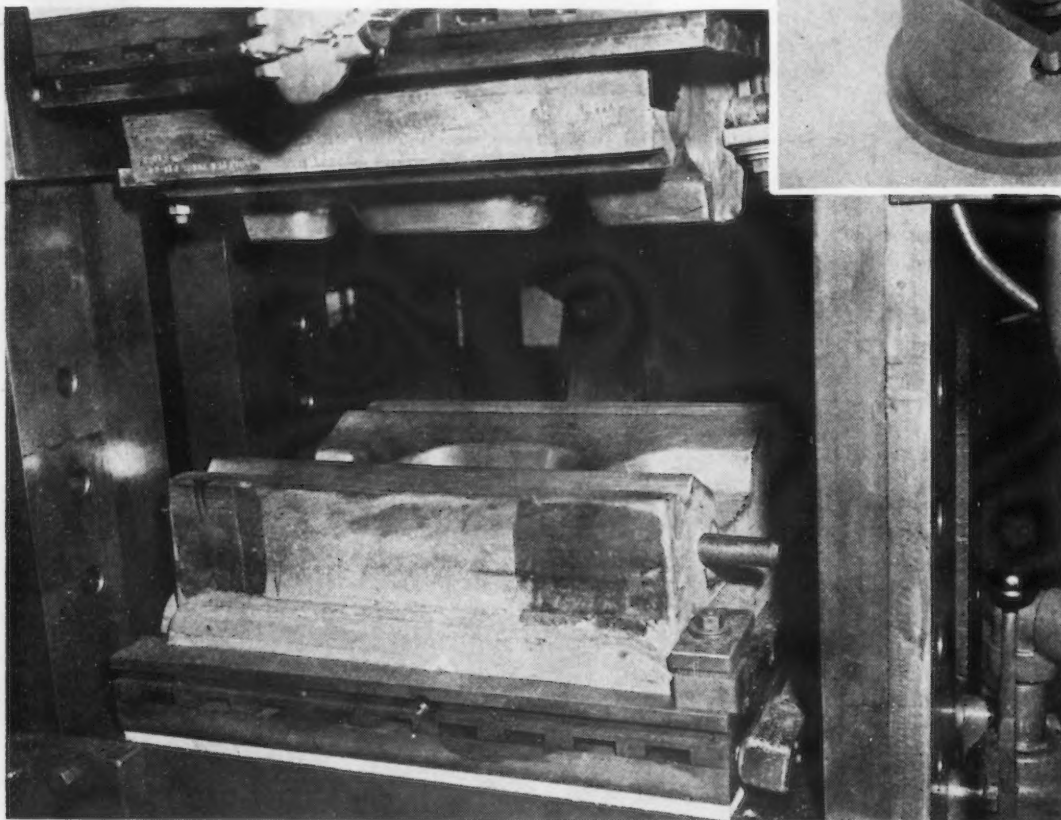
Kirksite laminating mold mounted on hot plates in 300-ton hydraulic molding press.
